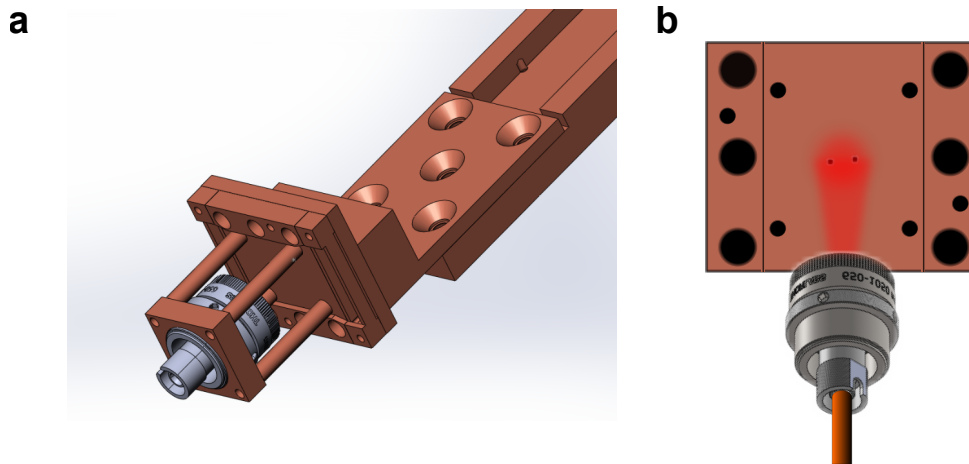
Schematic of installed collimator with sample holder and divergent light beam. (a) Schematic of sample holder model in SolidWorks, showing the collimator assembled in the frame, sample holder for PCB and bottom part of the cold finger. (b) Schematic of light beam given by collimator, showing the projection of light onto the holes at the central part of PCB cover.
